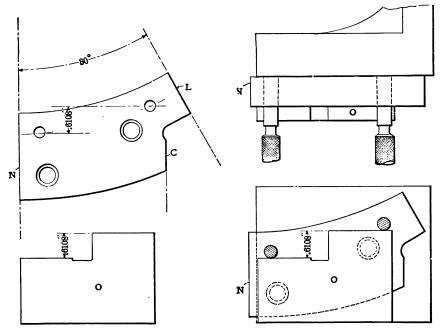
LOCATING INDEX BLOCK ON ANGLE PLATE FOR GRINDING LONG END
